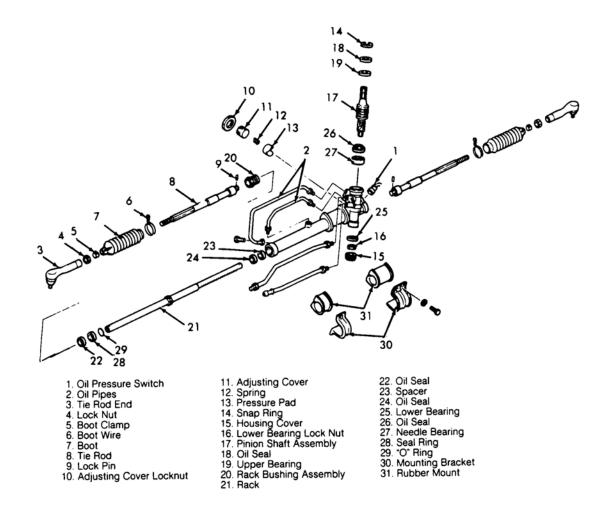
Elect. Controlled Rack & Pinion Steering Gear (MX6 & 626) Courtesy of MAZDA MOTORS CORP.
